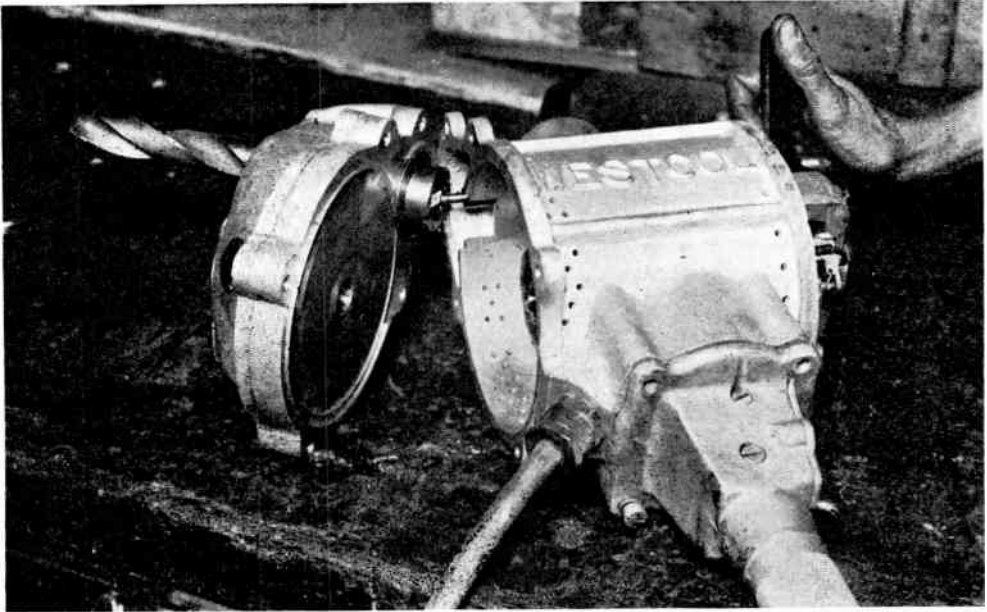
HOW TO EJECT THE DRILL BIT FROM A WESTOOL PORTABLE ELECTRIC TOOL.
